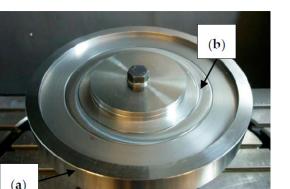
Test mounting of gear blank: (a) circular run reference surface; (b): axial run reference surface.
